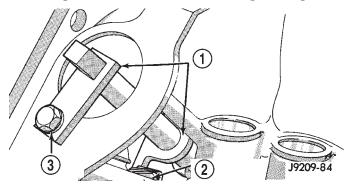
Camshaft Holding Tool C-3509 (Installed Position)
